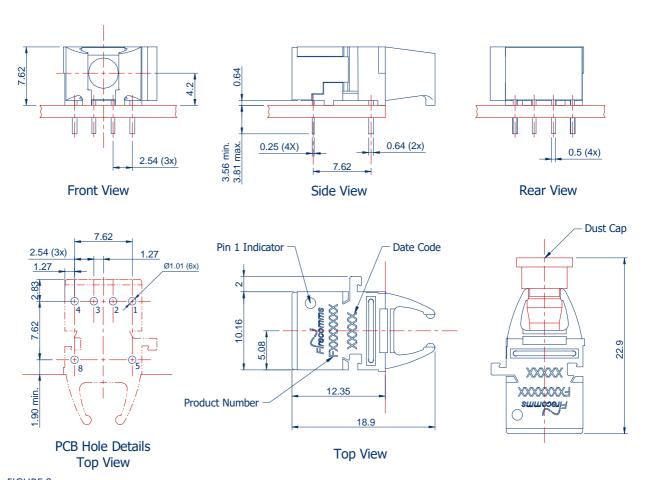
Mechanical dimensions of the horizontal connectors and PCB footprint, which is a top view General dimensional tolerance is  $\pm\,0.2~\text{mm}$
